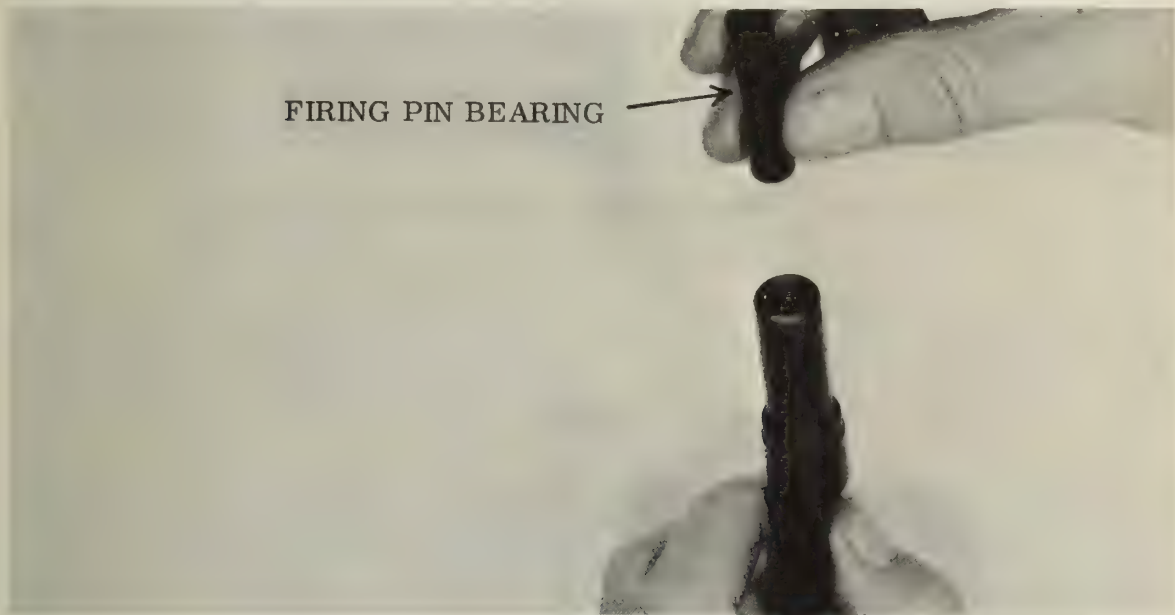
Removing/Replacing the Firing Pin Bearing.
